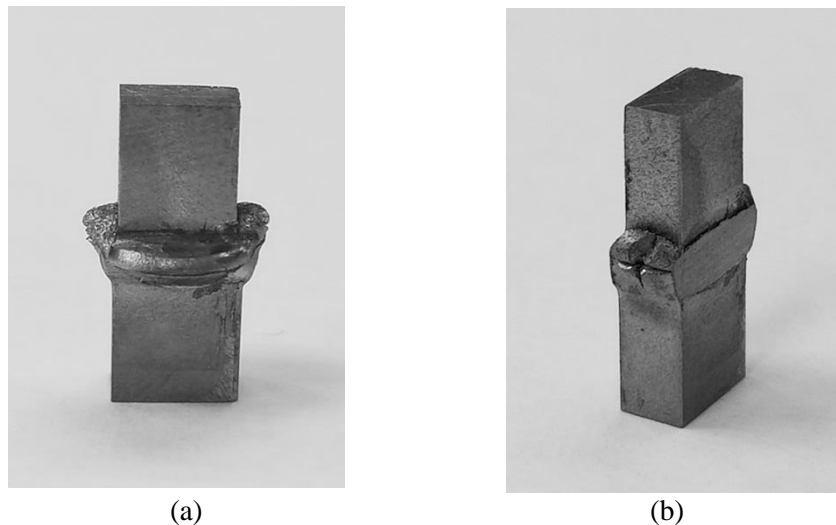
Removing expulsion region for cutting welded specimens, (a) prior to removing expulsion region (b) after removal of expulsion region.
